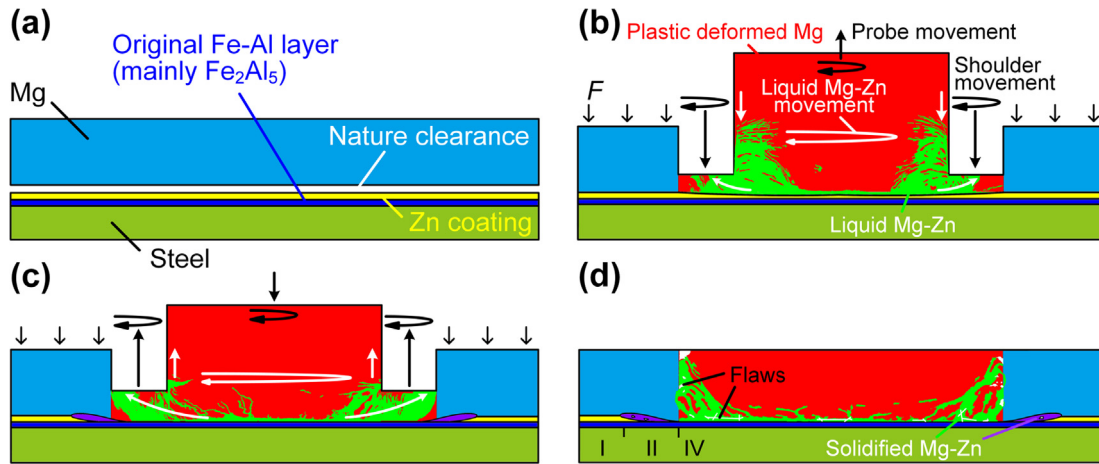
Illustration of the welding procedure in refill FSSW for the L-weld conditions: (a) before welding; (b) plunge stage; (c) retraction stage and (d) after welding.
